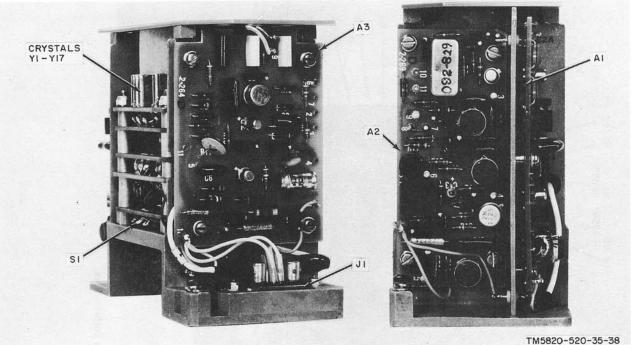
Printed circuit boards 1A8A1 and 1A8A2, parts location diagram.
